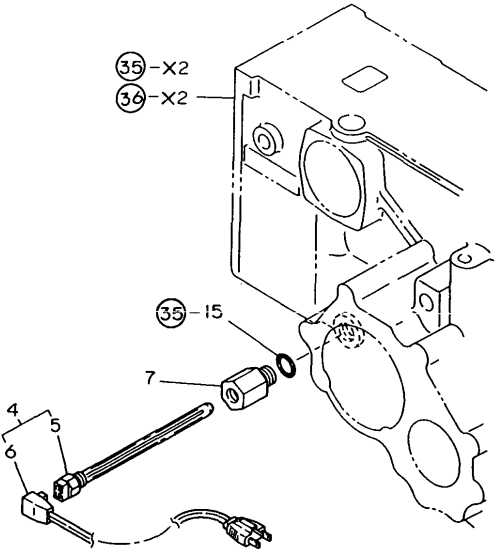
HEATER & FRONT WEIGHT [Optional Parts]
